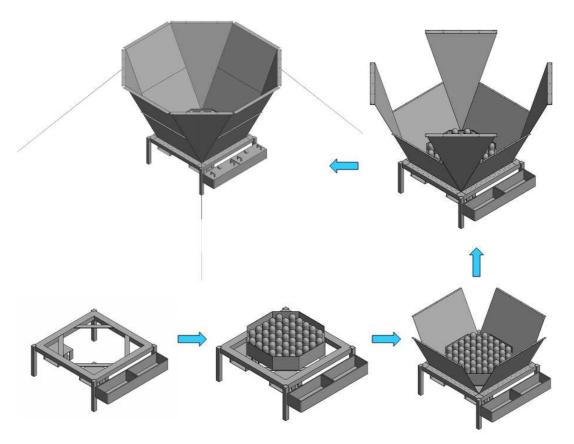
Assembly of the enclosure on top of the support stand (XFAS)
